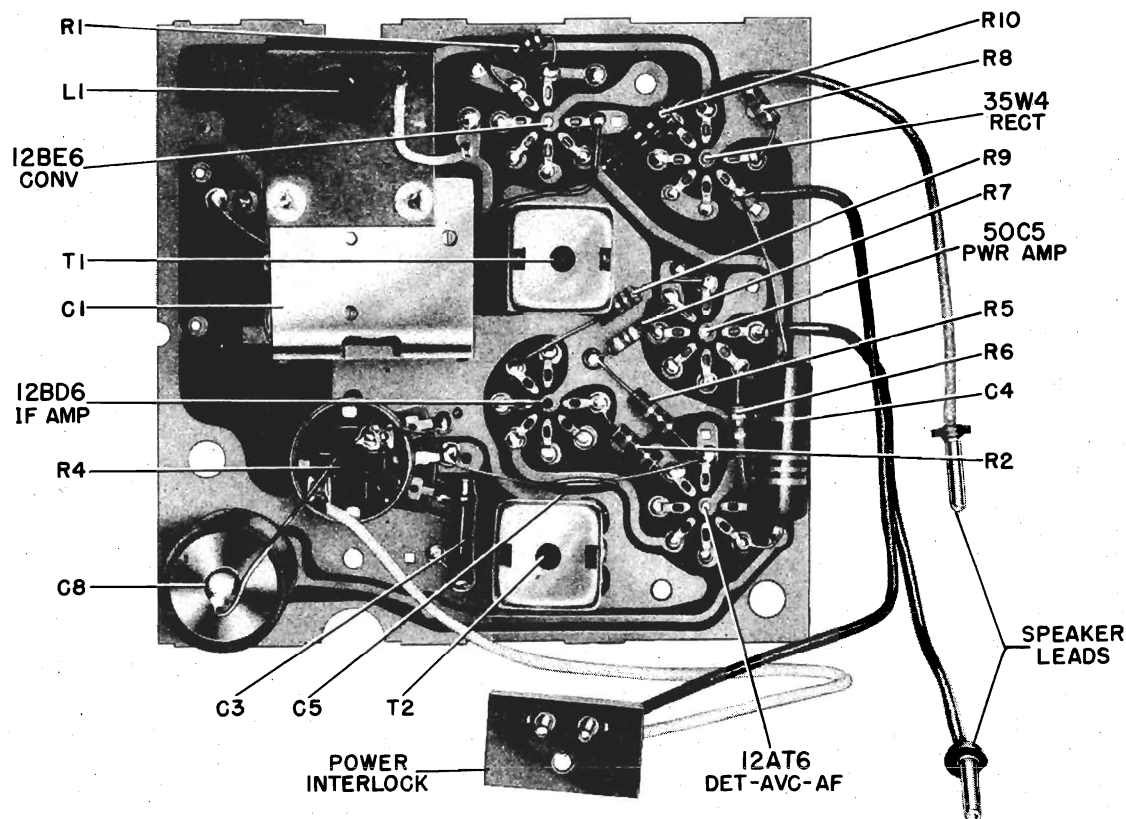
FRONT VIEW OF CHASSIS (EARLY MODEL)
